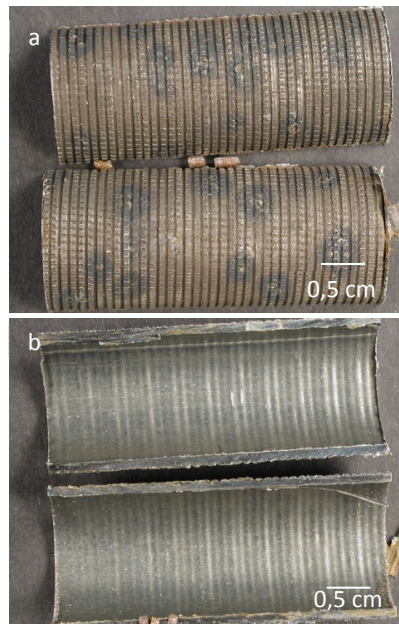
Macrographs of the stainless steel pipe external (a) and internal (b) surfaces.
